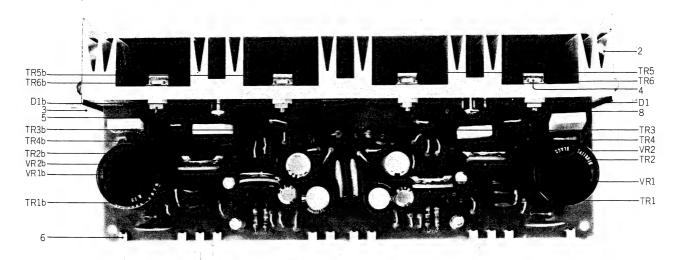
PHOTO OF SQ P.C. BOARD (97-5010) BLOCK
